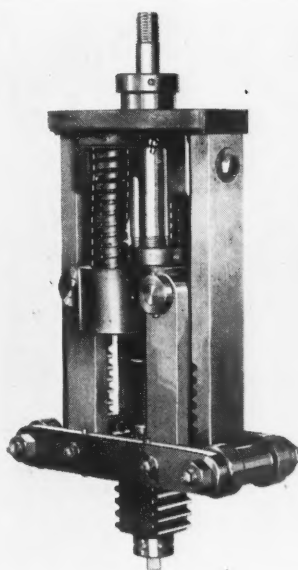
Simplex Drawing Device Redesigned for Compactness
